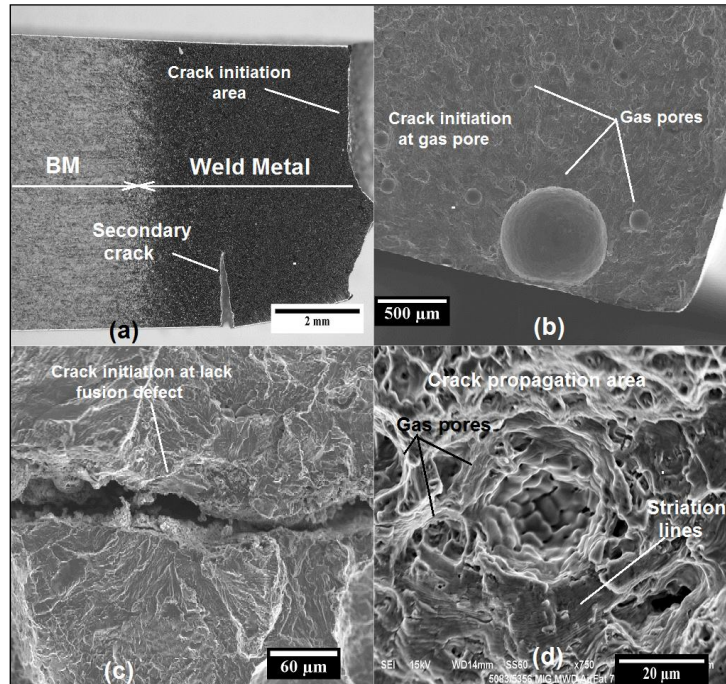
Typical fatigue fractures in 5083 welds: (a) crack initiation in the weld metal; (b) crack initiation associated with a large gas pore; (c) crack initiation at a lack-of-fusion type defect; (d) crack propagation associated with gas pores.
